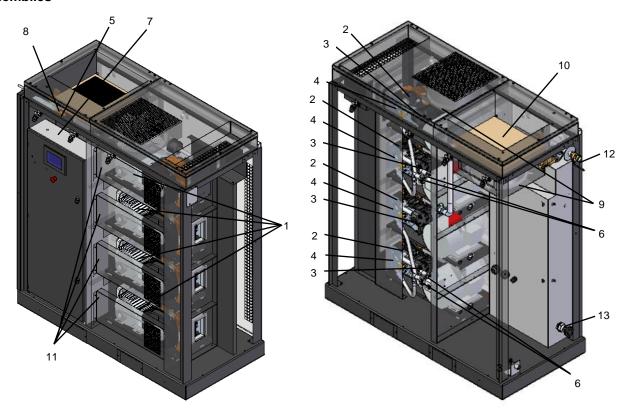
Overview of the assemblies: Oil-free scroll compressor 11~15 kW
